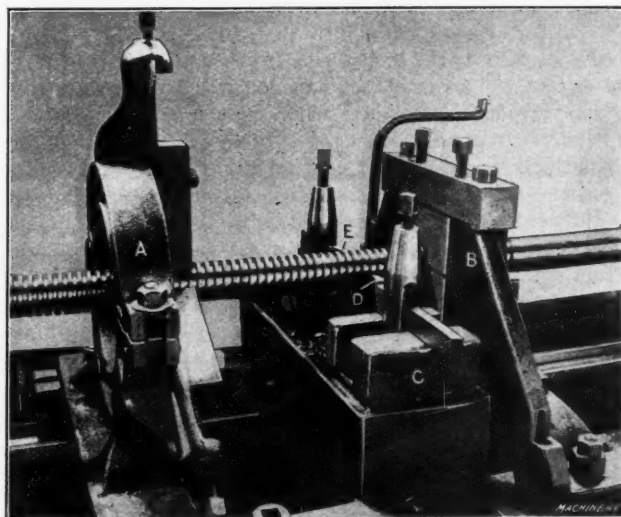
Threading Operation, using Two Tools to permit cutting on both the Forward and Reverse Movements of the Carriage
